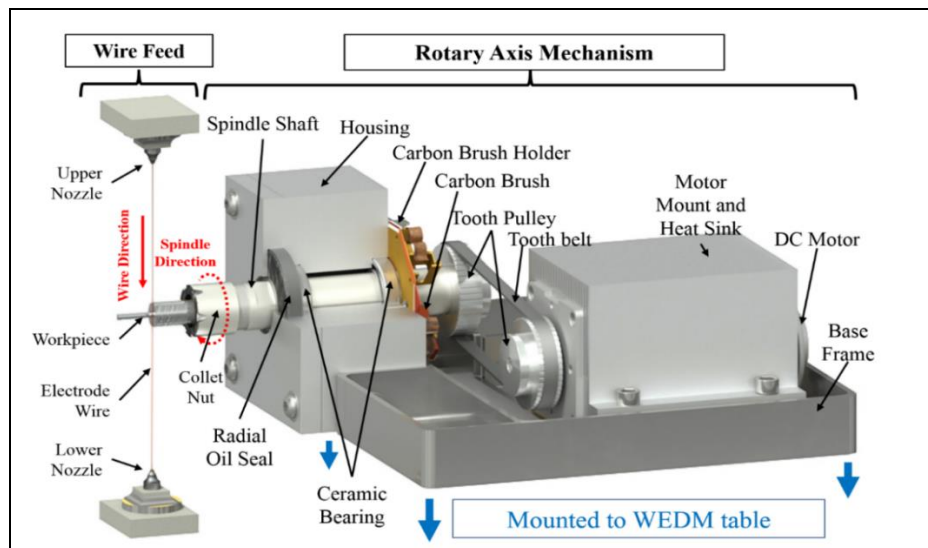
CAD design of final assembly of rotary axis mechanism for ultrasonic WEDT.
